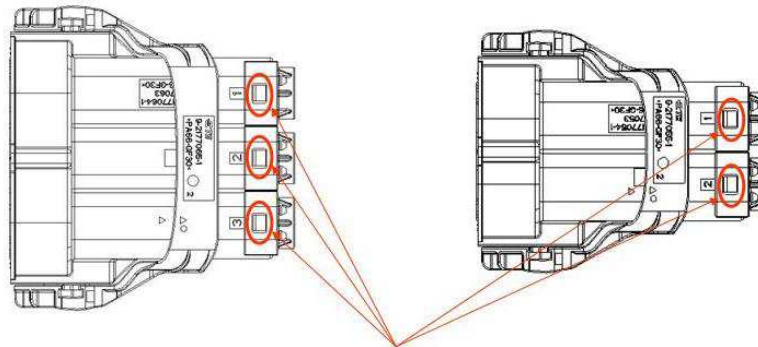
Assembly 2pos. connector/Montage 2-pol. Stecker
